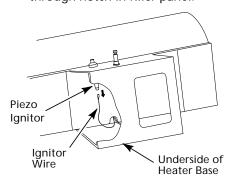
Removing Ignitor Wire From Piezo Ignitor
